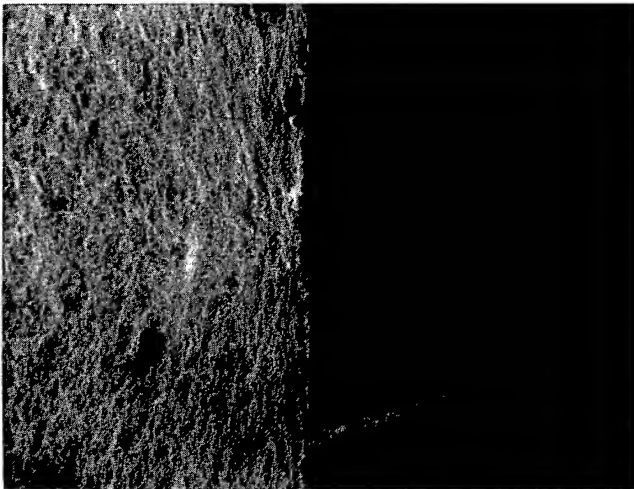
SEM fractograph of D3 containing a corrosion pit at the crack origin. Mag. 250x.
